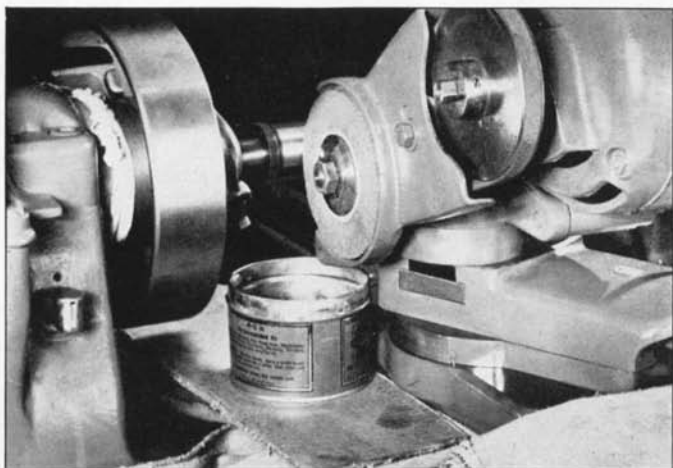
A small cup of oil may be placed below the grinding wheel to catch dust particles.
